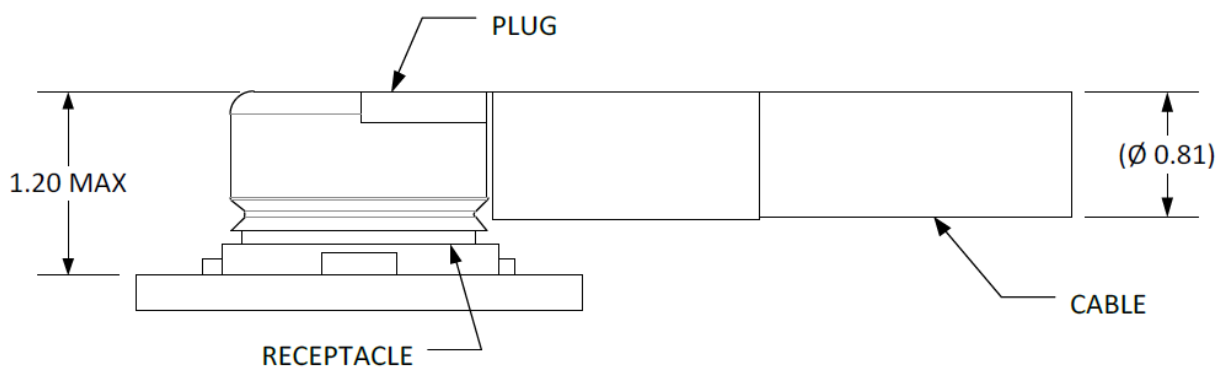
Connection between RF Connector and Mating Plug Using $\varnothing 0.81$ mm Coaxial Cable
